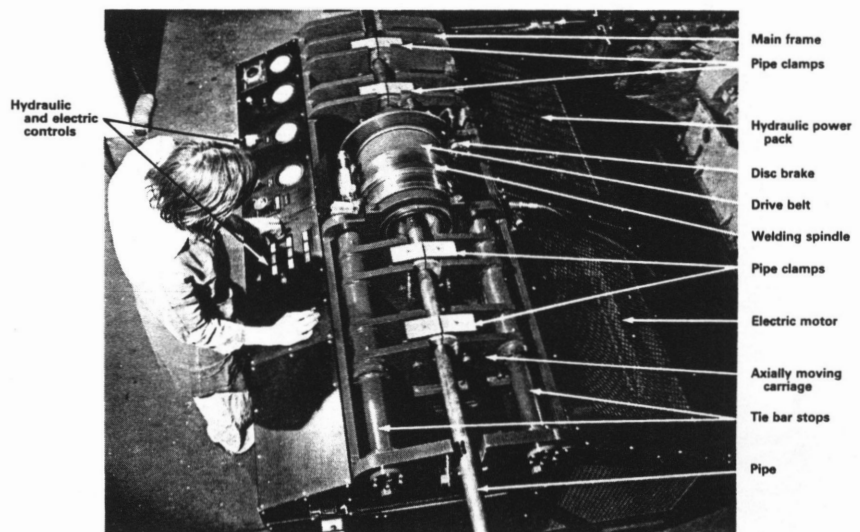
Radial friction-welding machine with a 51 mm (2 in.) diameter
